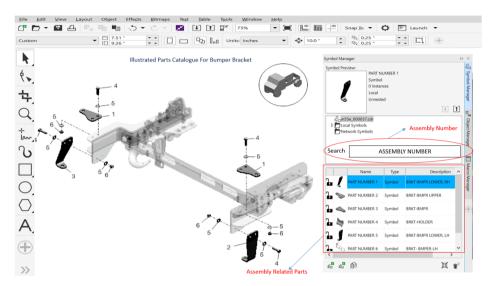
Illustrated Tool Library Searching Assembly Number.
